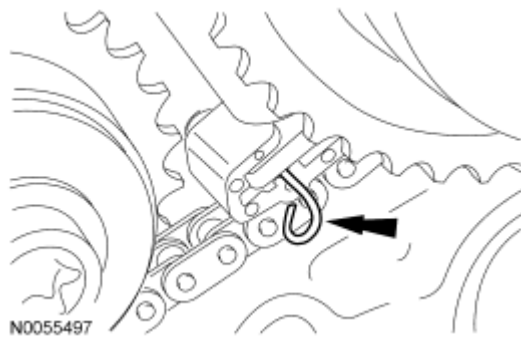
Identifying Lock Pin On RH Secondary Timing Chain Tensioner
